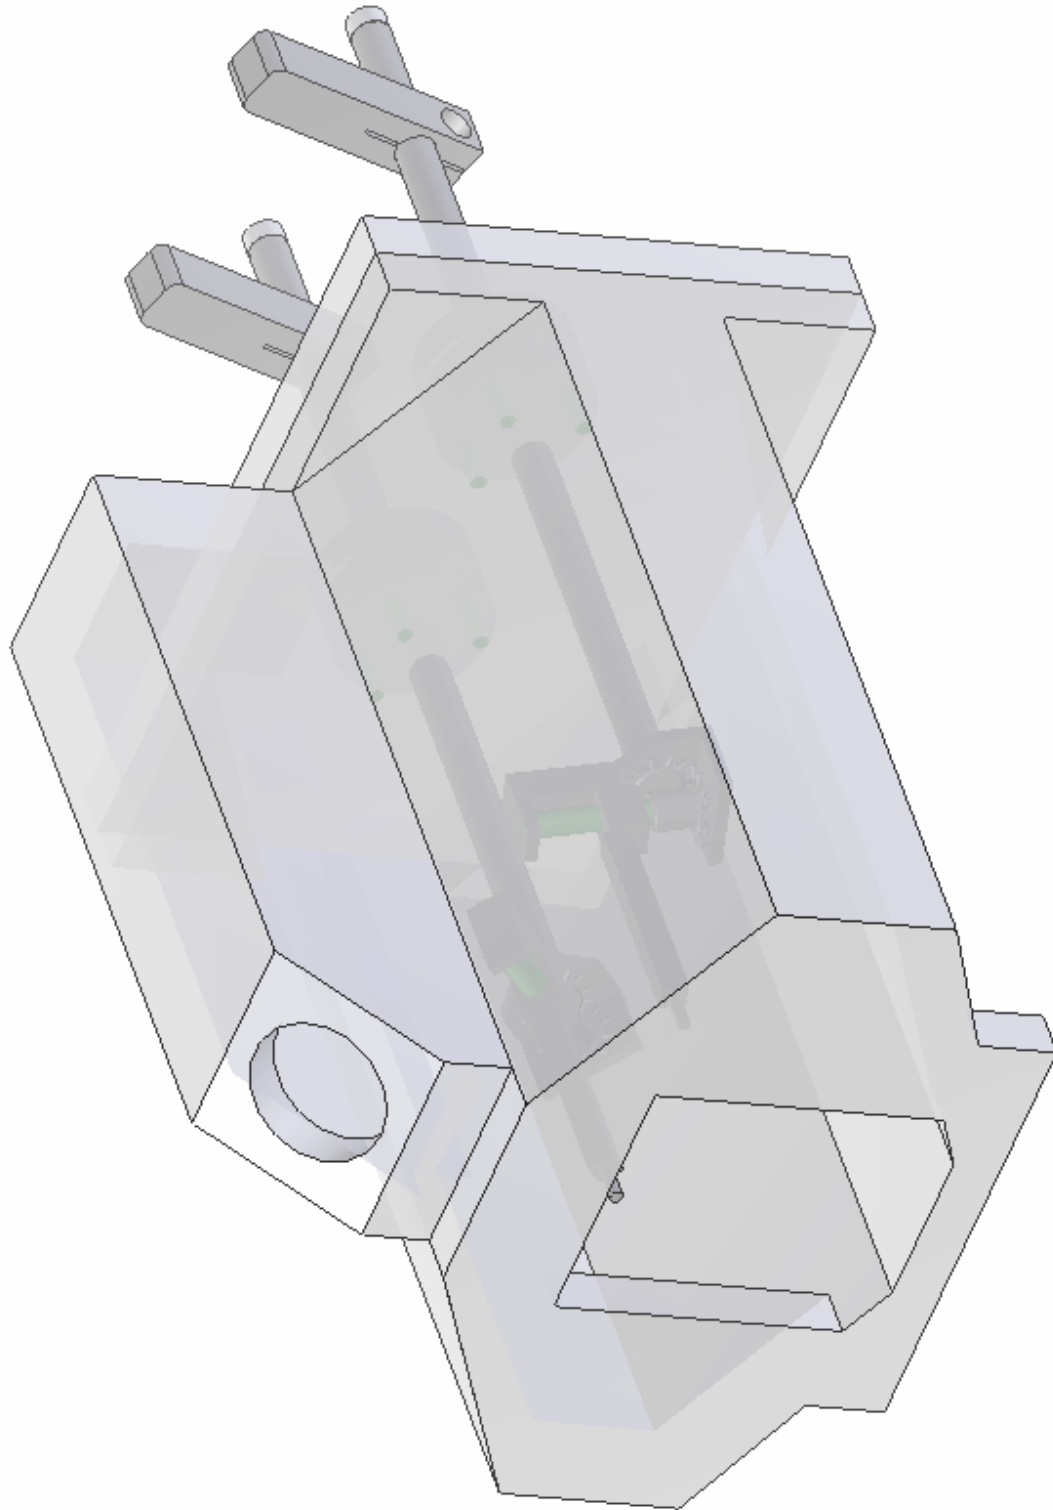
Assembly view of the left ventricle model with the papillary muscle holding system attached.
